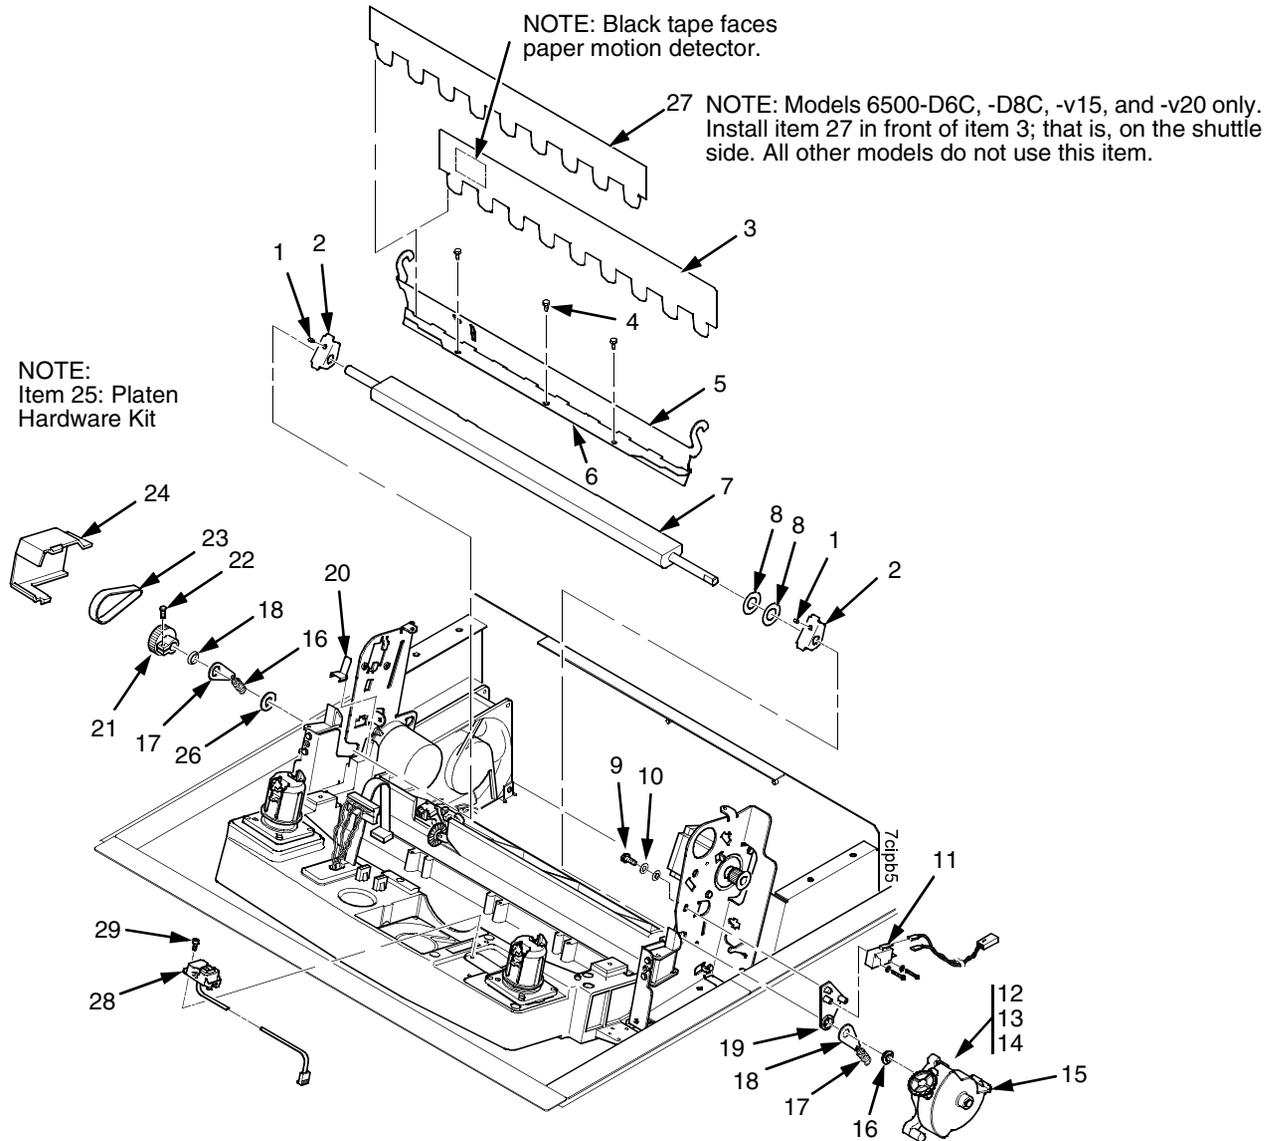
This illustrated parts breakdown shows the platen and paper ironer assemblies.
